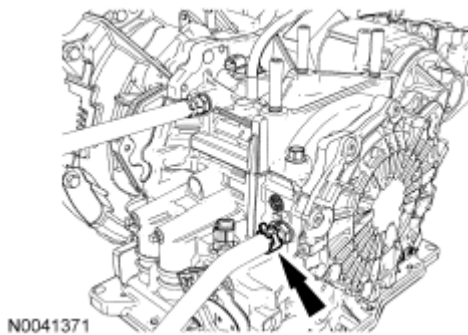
Locating Transmission Fluid Cooler Return Hose
